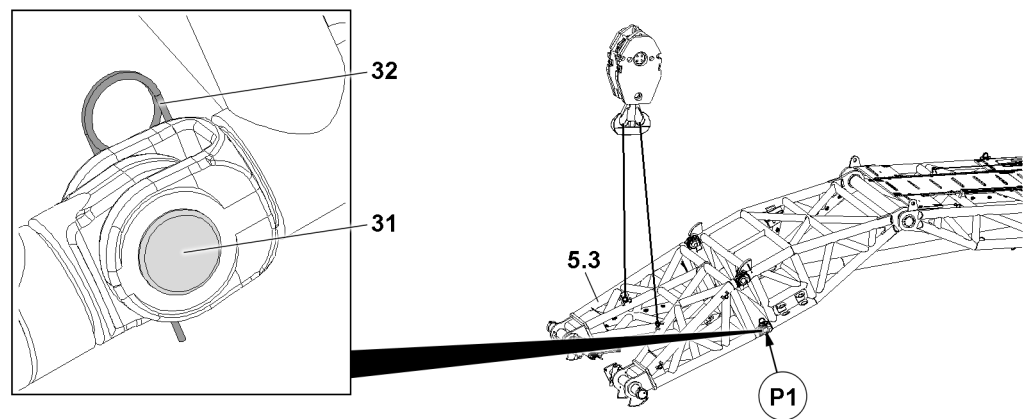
Assembling the end section — Pinning the end section at the bottom
